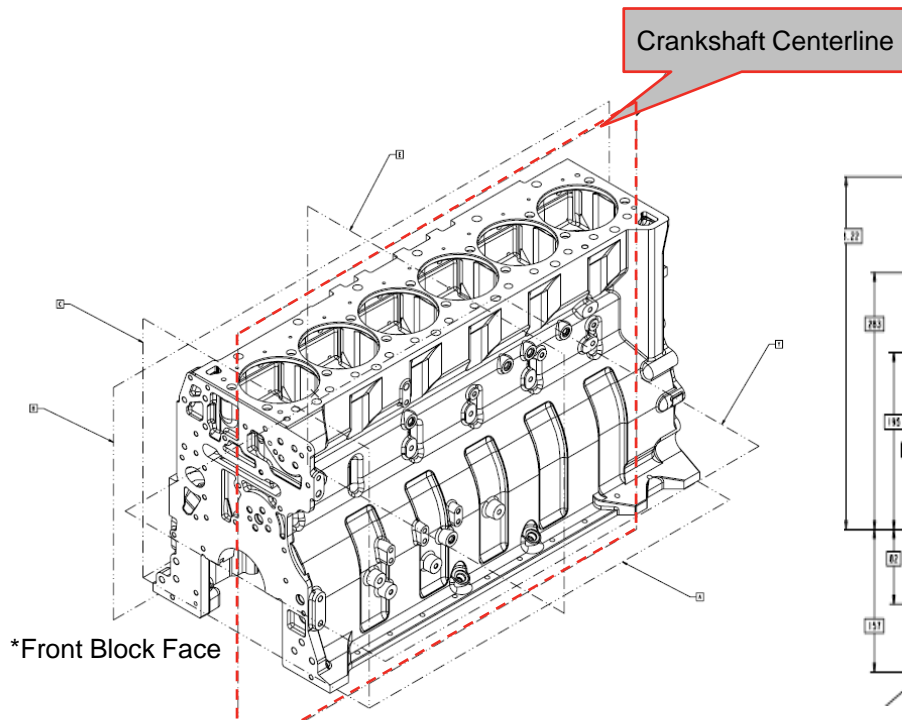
CAD drawing of the ISX 15 engine block.<sup>4</sup>
